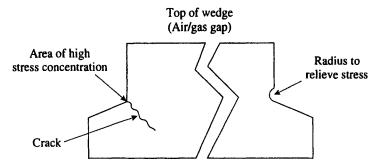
[R10] Cross-section of aluminum rotor wedge showing stress area.
